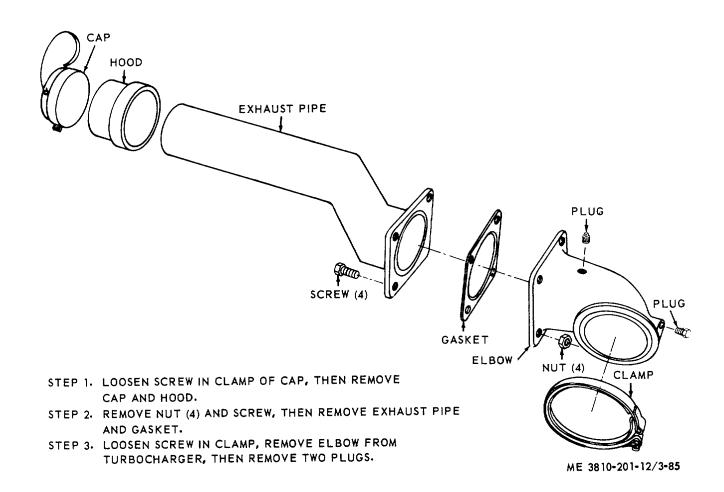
Exhaust pipe, hood, cap, and elbow, removal and installation (engine model D333TA).
